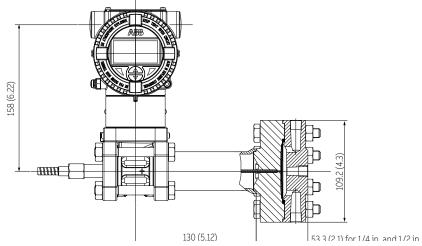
266DRH with barrel housing and direct mount seal S26Mx off-line flanged (For dimensions of S26 seals refer to the S26 datasheet)
